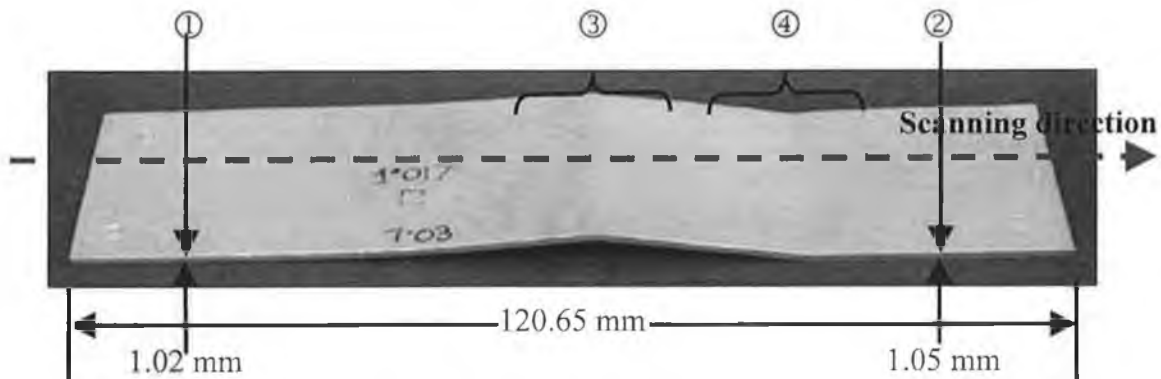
Kinked 1 mm thick aluminium plate (sample-3)
